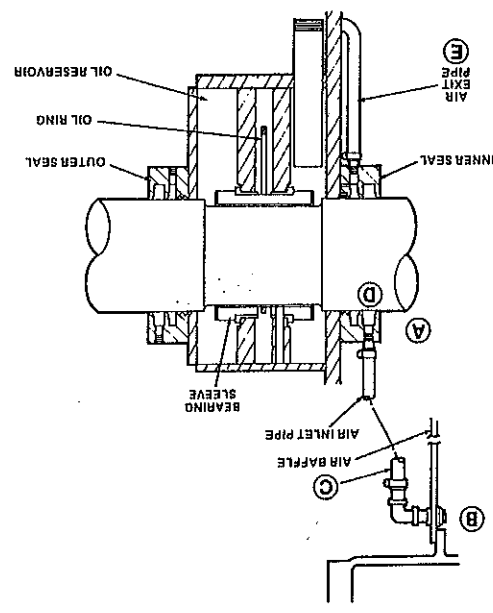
Labyrinth oil seals neutralize air pressure along the rotor shaft and prevent oil mist from moving toward the inside of the machine.
